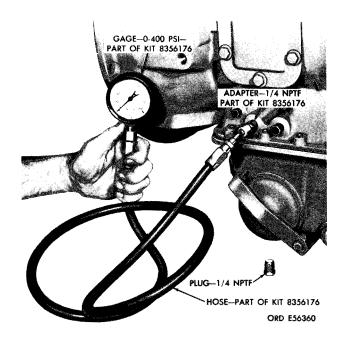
Pressure gage attached to ¼ NPTF pressure check point (gage, adapter, and hose are part of kit 4910-572-8612 (8356176)).
